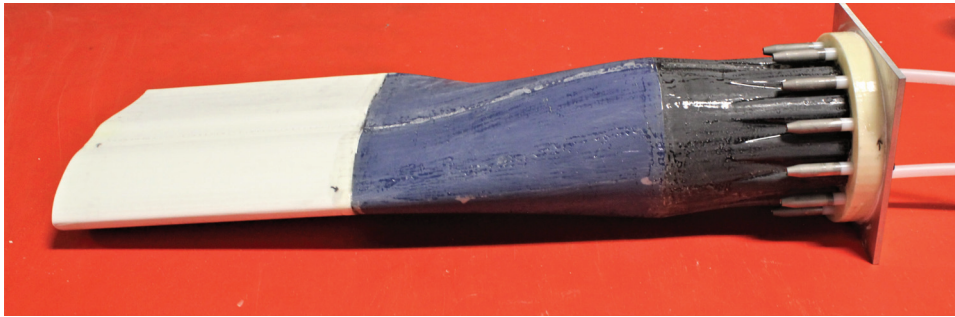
The 3D-printed mold sections after being sanded, sealed with epoxy, and fully assembled, ready for the composite manufacturing process. The root inserts were bolted in place for display purposes.
